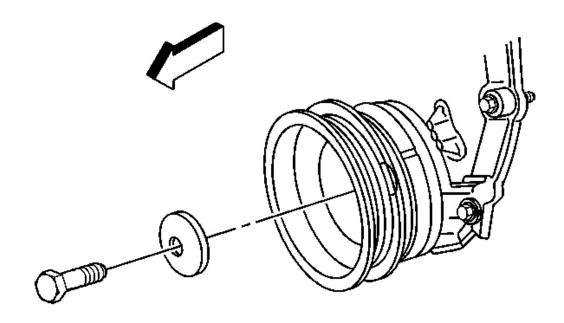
View Of Crankshaft Balancer Washer & Bolt Courtesy of GENERAL MOTORS CORP.
